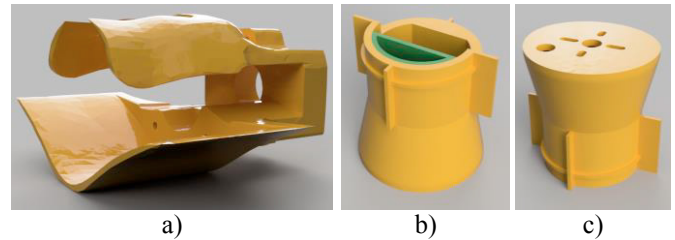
Motor and platform mounting system a) platform to the balloon mount b) bottom part of motor mounting, c) top part of motor mounting
